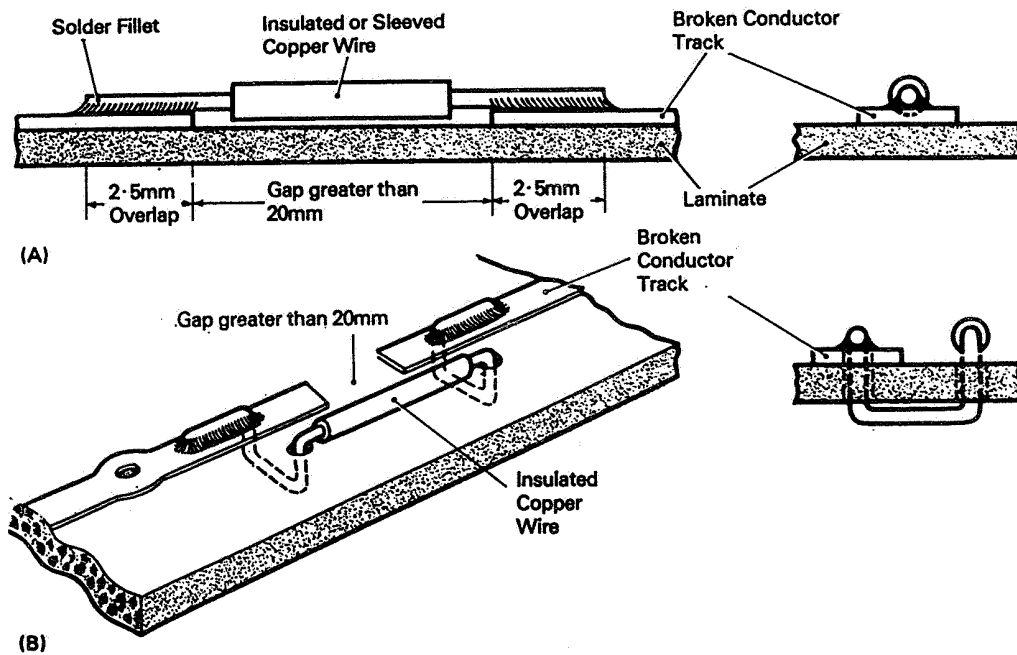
BROKEN TRACK REPAIRS (Gaps greater than 20 mm)
